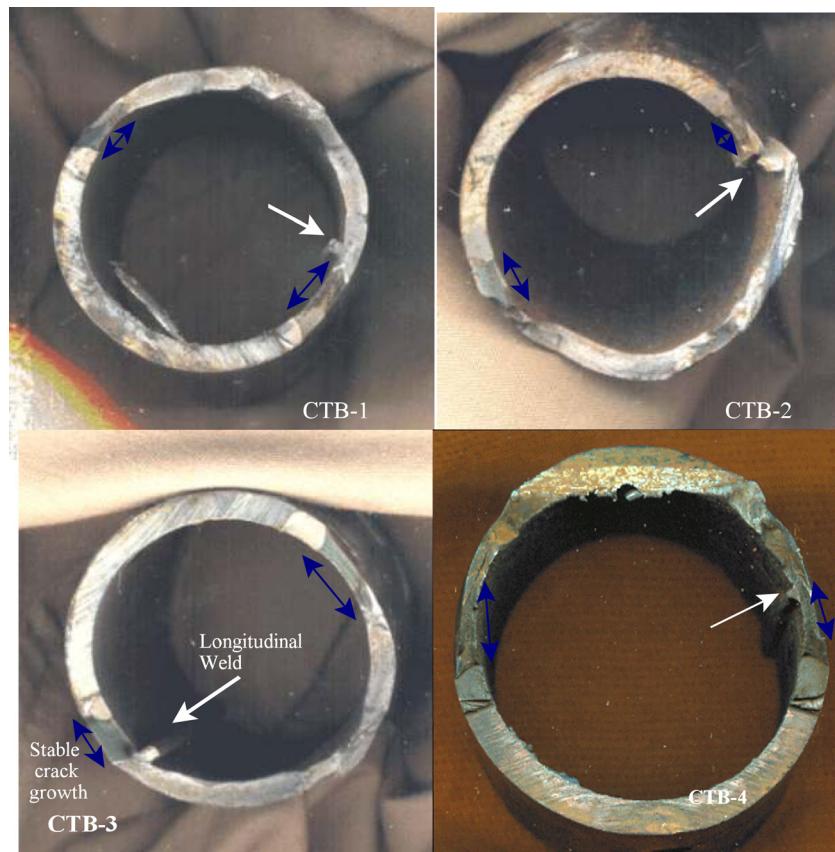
Fracture surfaces of four of the tested coiled tubing
